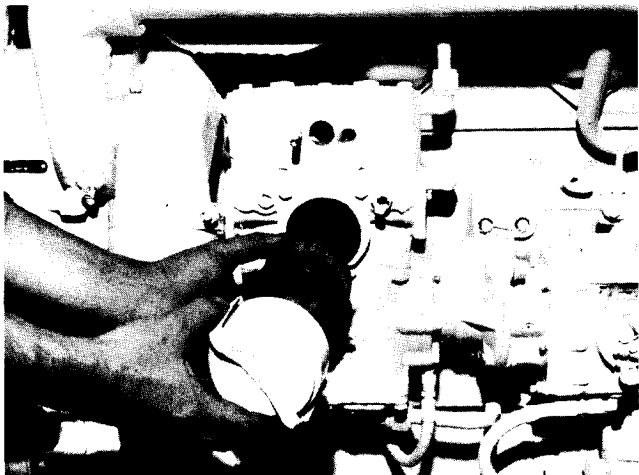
, (V41420). Bendix-Westinghouse air compressor breather
